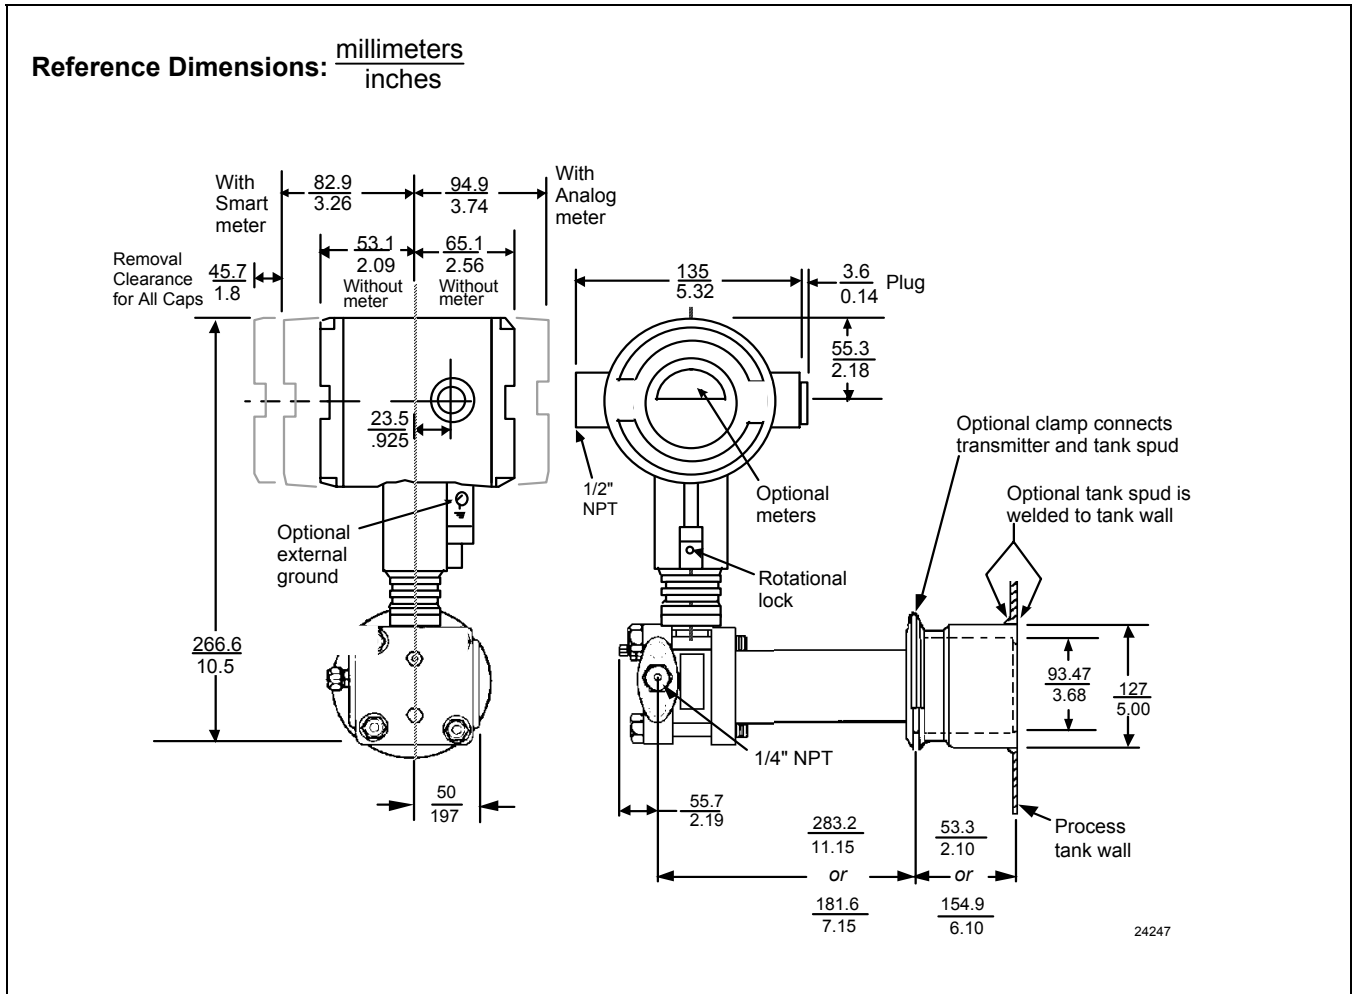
Typical mounting dimensions for Flange-Mounted Liquid Level Transmitter with sanitary flange for 4-inch diameter tank spud—For Reference Only
